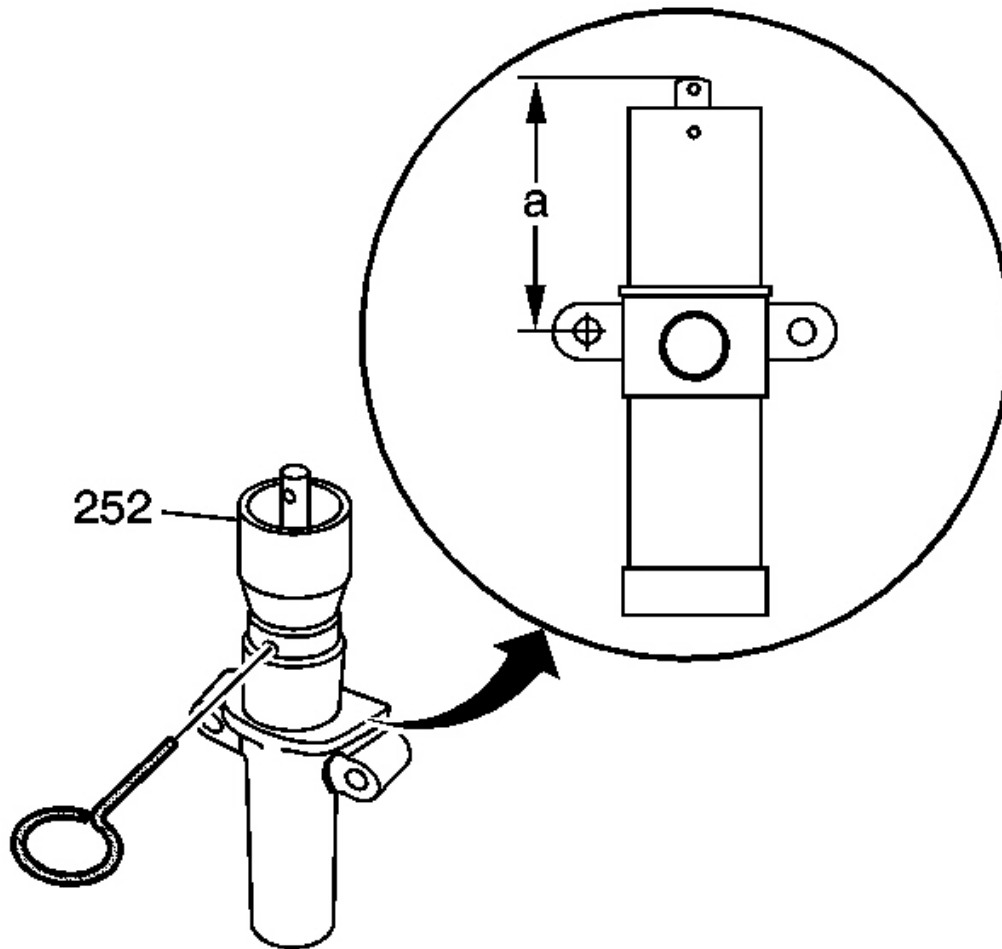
Measuring The Dimension Of The Rod At Full Stroke
